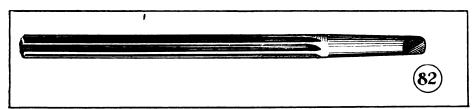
Steering bracket bushing reamer which is used for reaming the starting crank bushing
